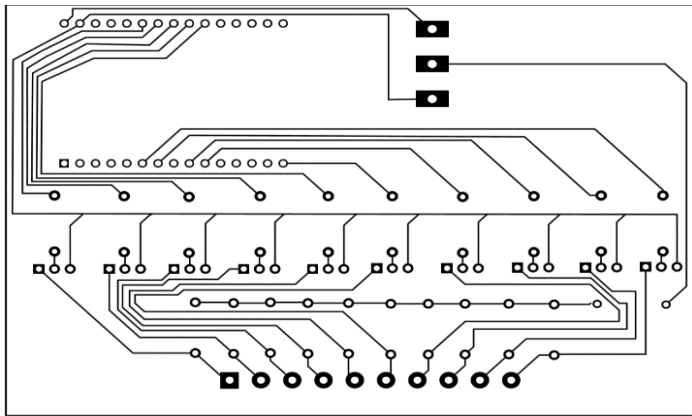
PCB Layout of the Wireless Light Switch Controller.
